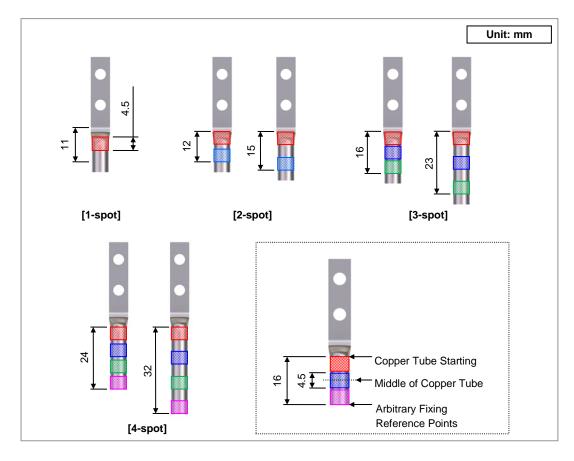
Pressure Reference Drawing (Handheld Compressor)
